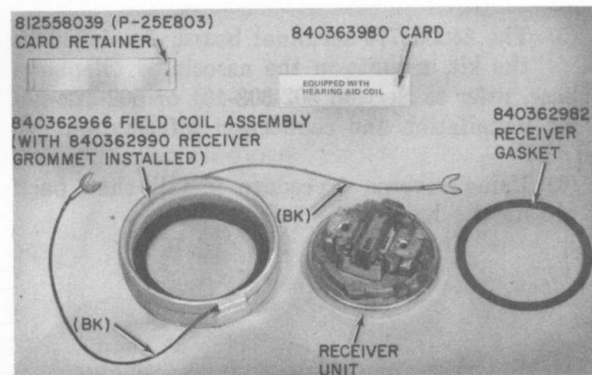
D-180719 Kit of Parts and Receiver Unit
